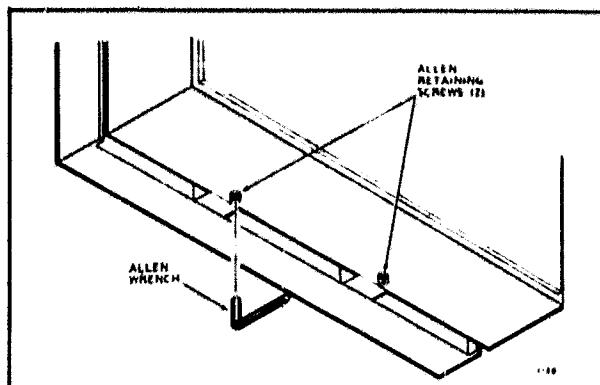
INSTALLATION LOCKING COVER SCREWS ASSEMBLY.
